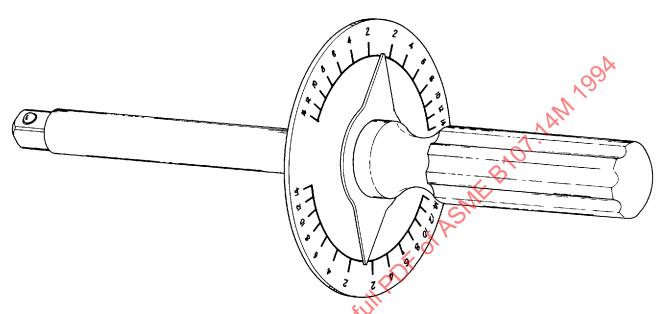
TYPE 1, CLASS C, STYLE 2 — SCREWDRIVER GRIP EXPOSED DIAL INDICATING TORQUE WRENCH
